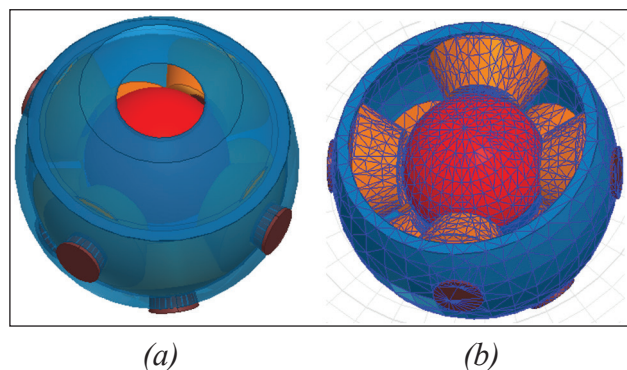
(a) - (b) Two perspective views of the designed spherical motor
